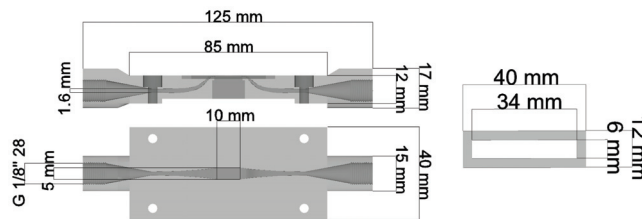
Technical drawing of the final design of the measurement cell frame and gasket, including important dimensions.
